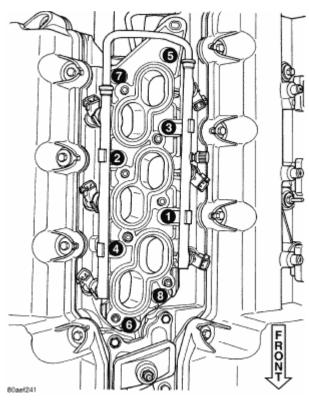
Identifying Lower Intake Manifold Tightening Sequence Courtesy of CHRYSLER LLC
